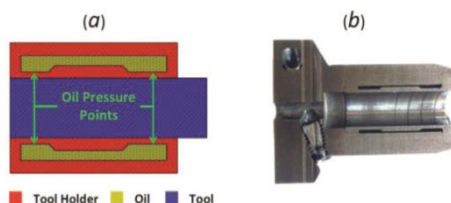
(a) Hydraulic holder working principle (b) real component cross section
